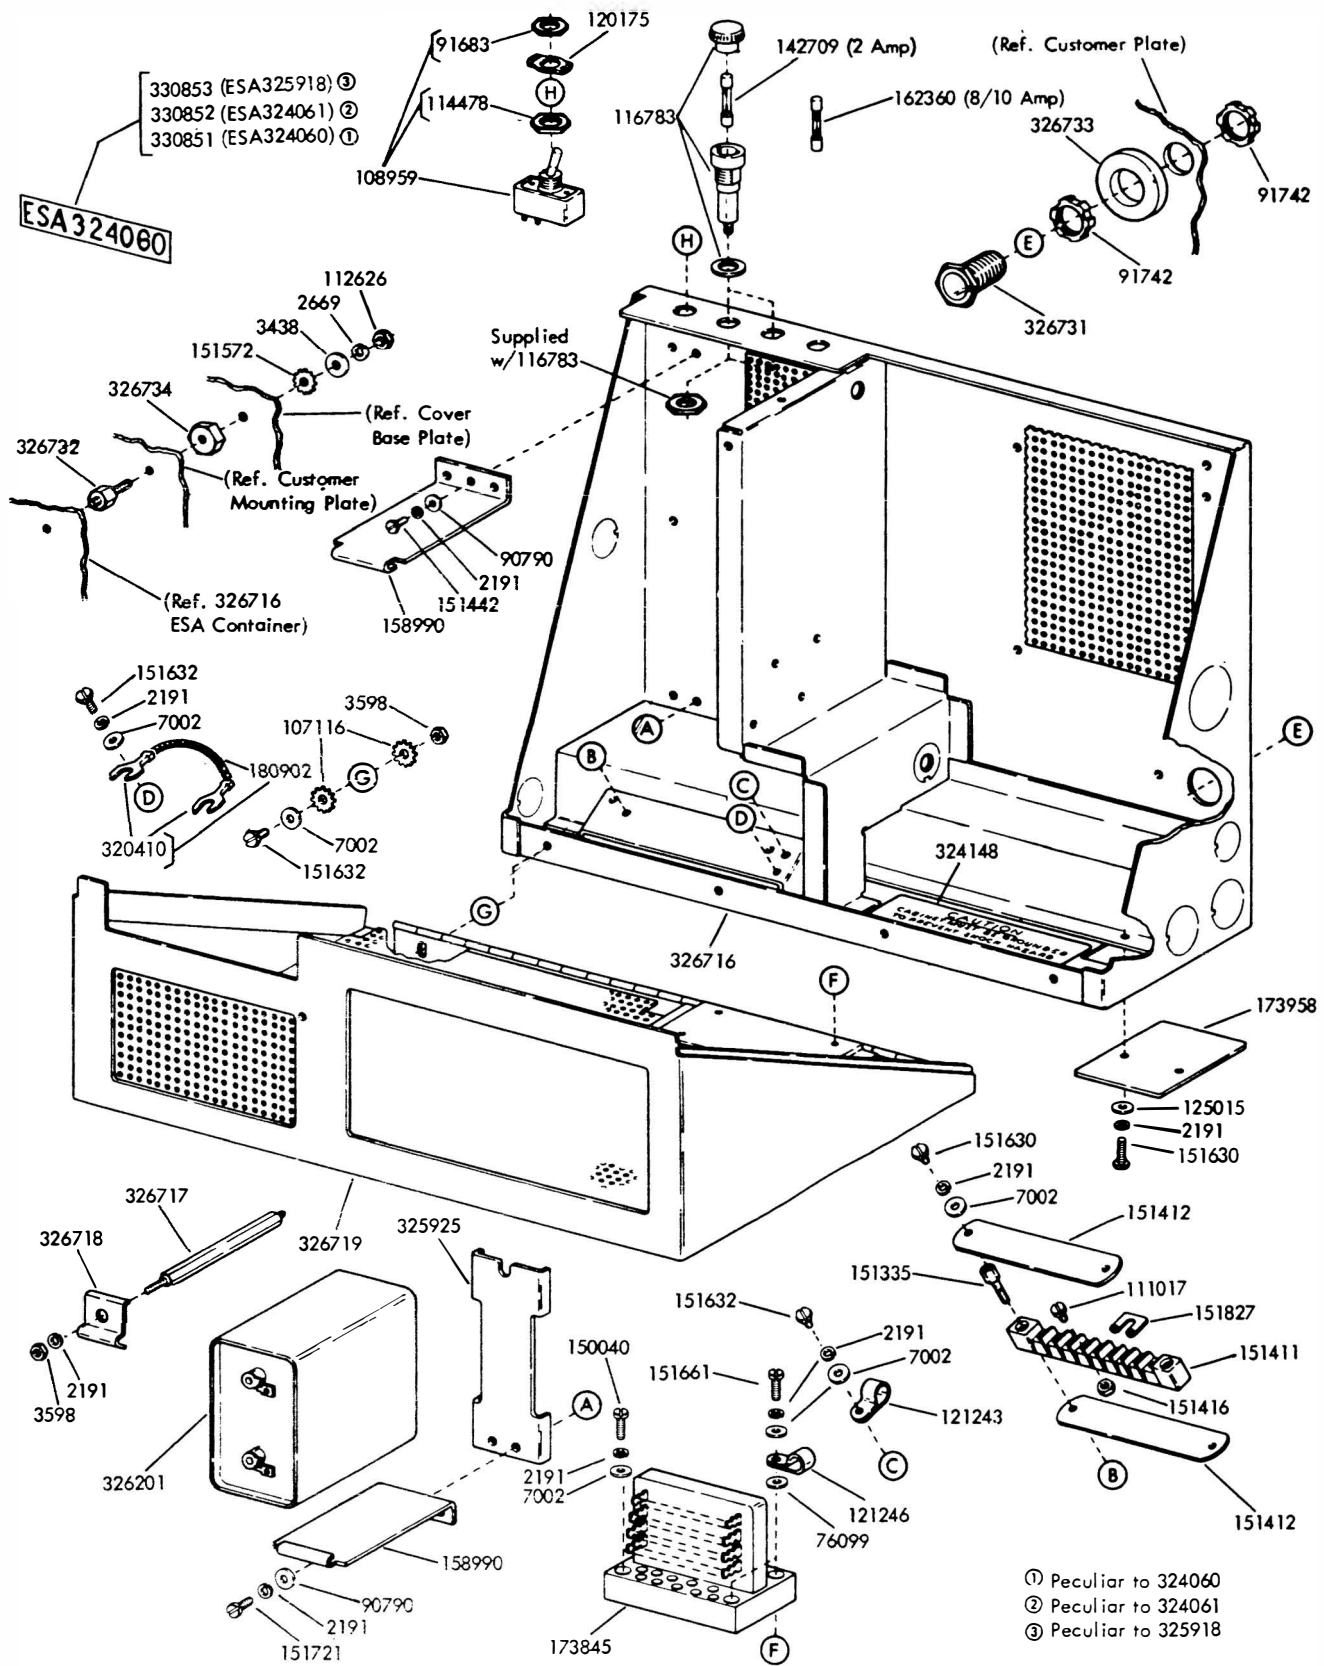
324060, 324061 and 325918 ELECTRICAL SERVICE ASSEMBLIES - Used w/KSR and RO Sets
